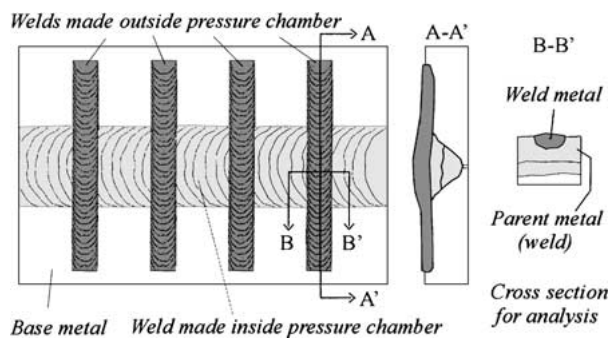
Schematic showing a large weld bead first made inside the high N_2 pressure chamber and welds on the same plate subsequently made at atmospheric pressure outside the chamber.
